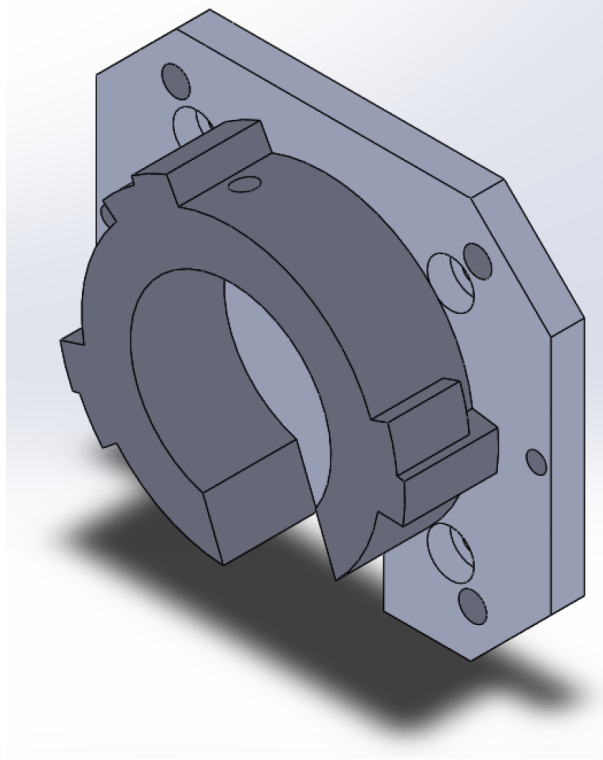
Design of the bottom part of the mechanical interface for the neck attachment.
